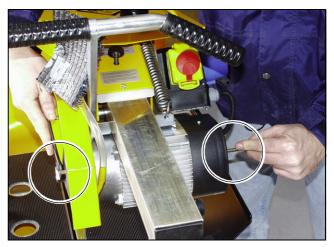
Loosening the cutting shaft nut by counter pressure of the cutting shaft
